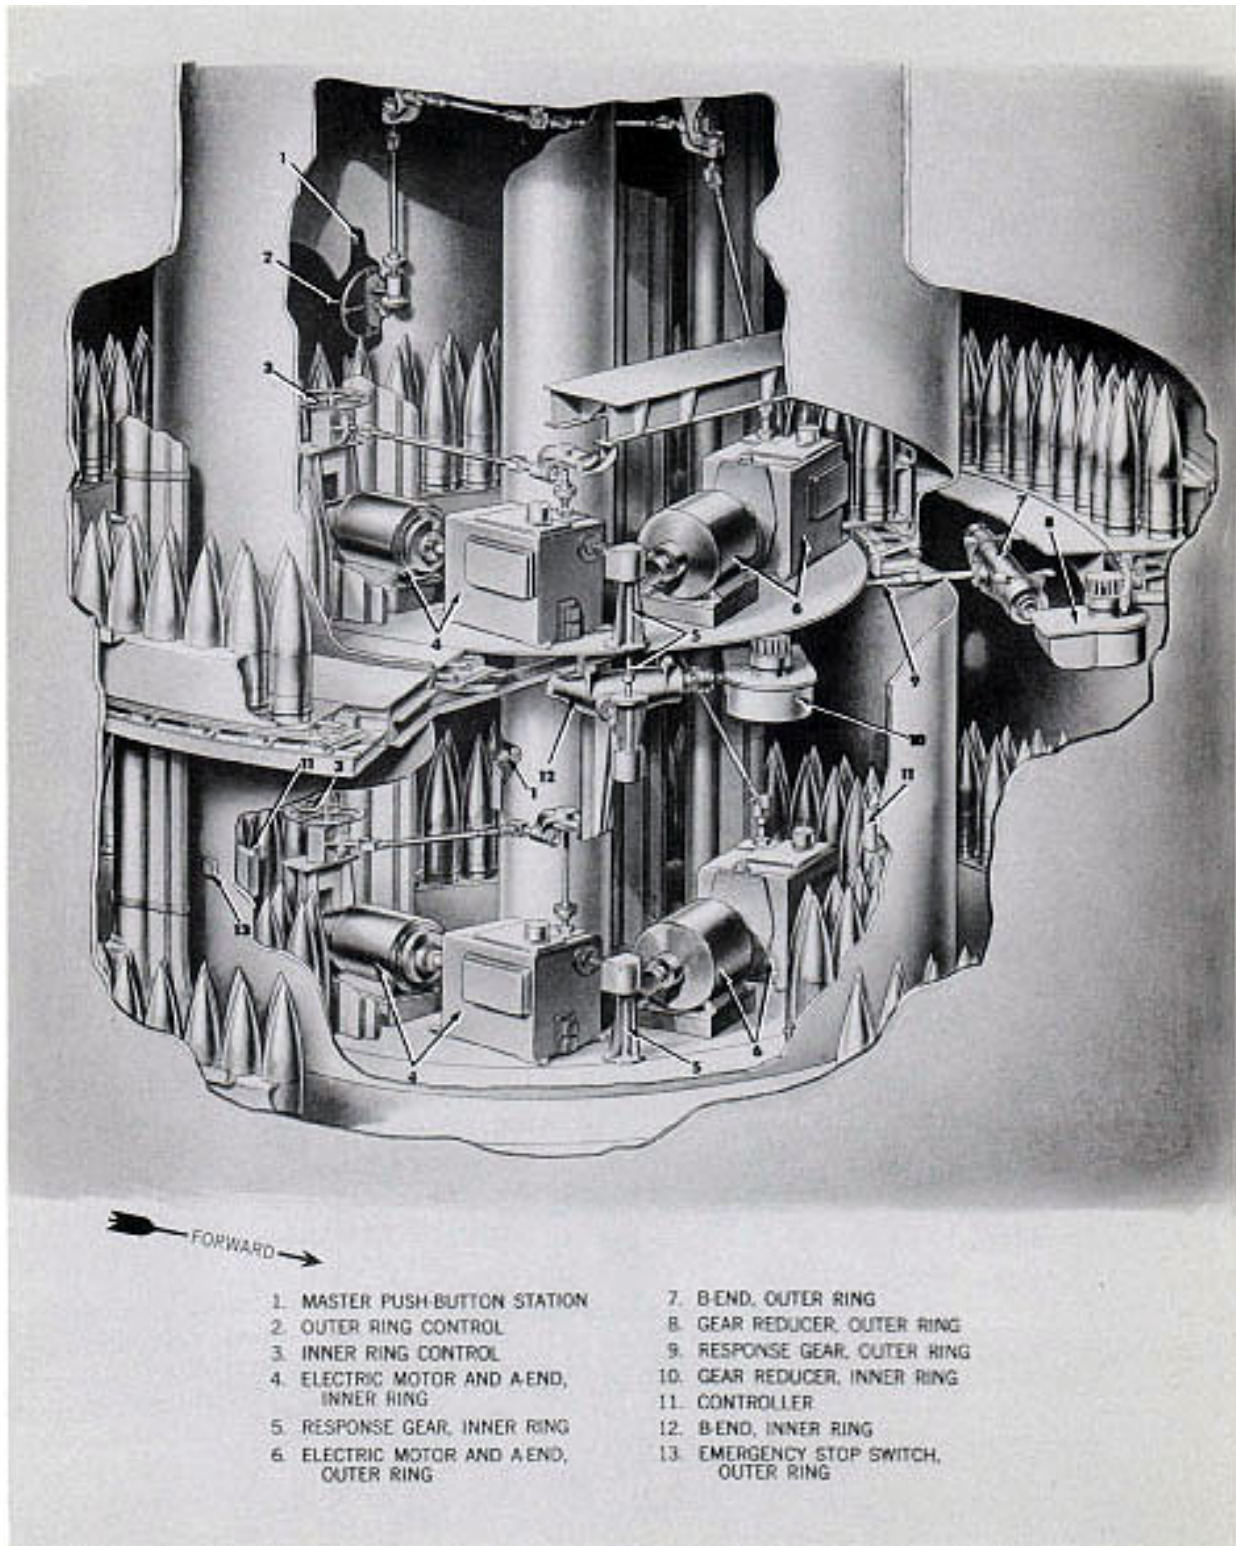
Projectile Ring. General Arrangement, Upper and Lower Projectile
